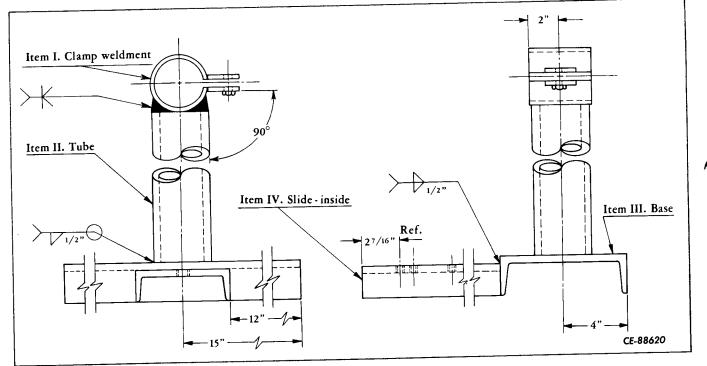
B. Stand Weldment Assembly - Left Hand (1 Required). (Details Shown in Figures 6-86, 6-87, 6-88 and 6-90.)
